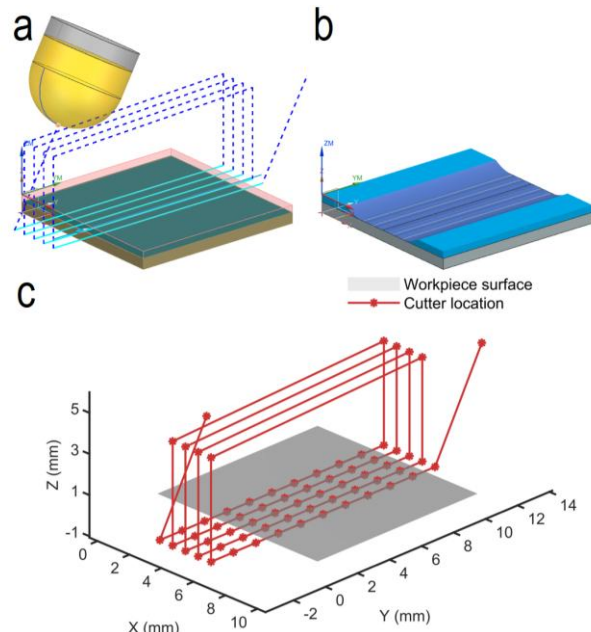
Three-dimensional CAM simulation: (a) cutter and workpiece; (b) scallop-free Siemens NX CAM simulation; (c) tooltip positions and workpiece surface
